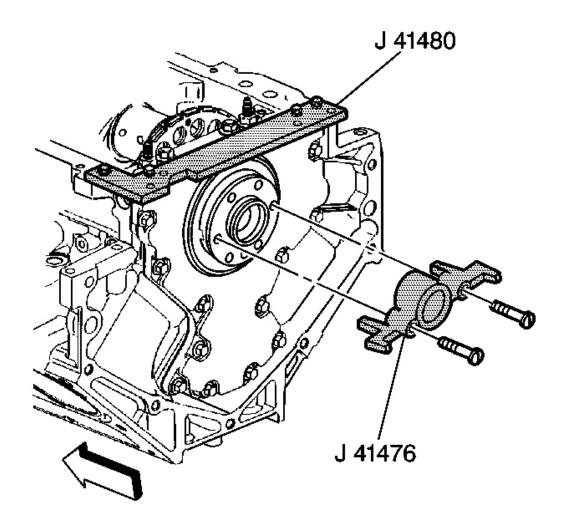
View Of J 41480 & J 41476 Courtesy of GENERAL MOTORS CORP.
